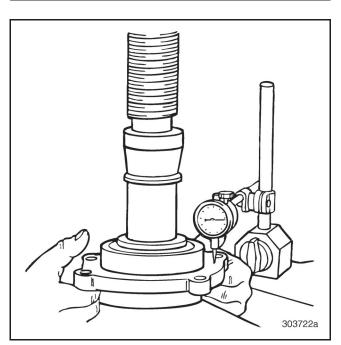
Measuring End Play with Bearing Cones and Spacer Assembled in Retainer
